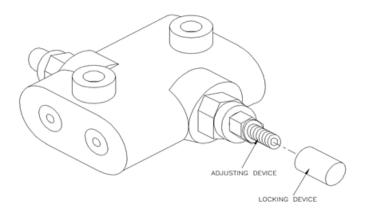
ADJUSTING THE CUSHIONING VALVE
